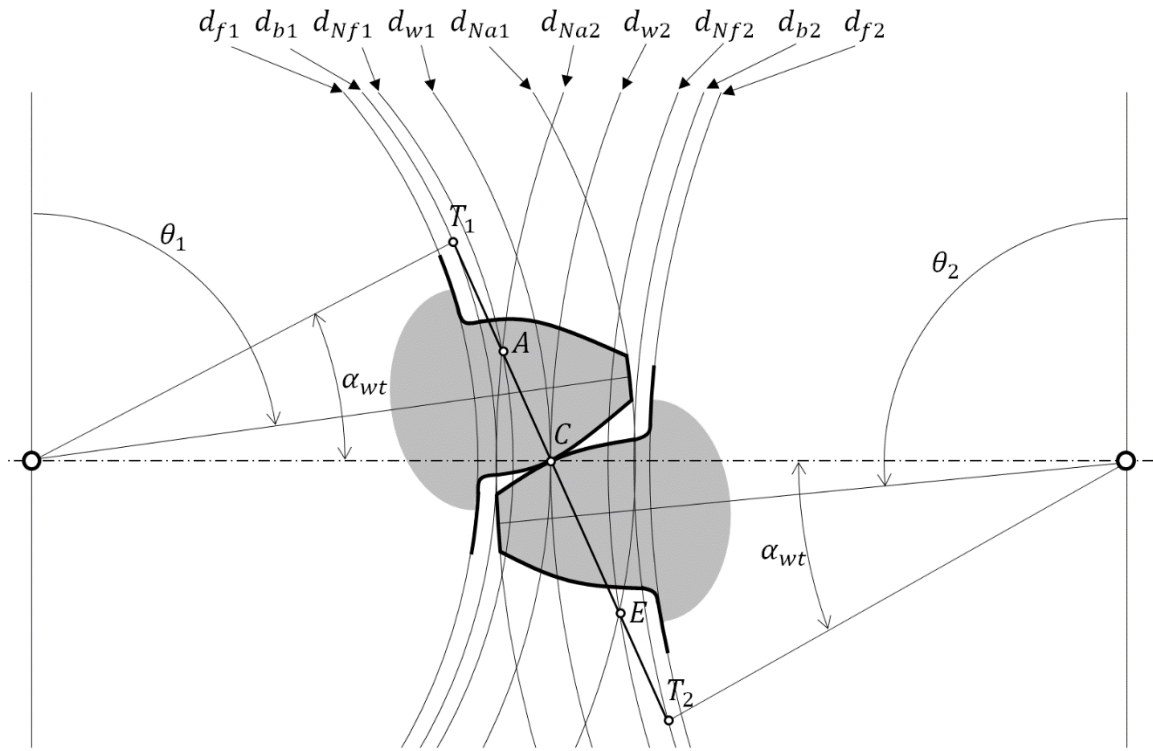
Active tooth flanks in a transverse section of an external gear pair
